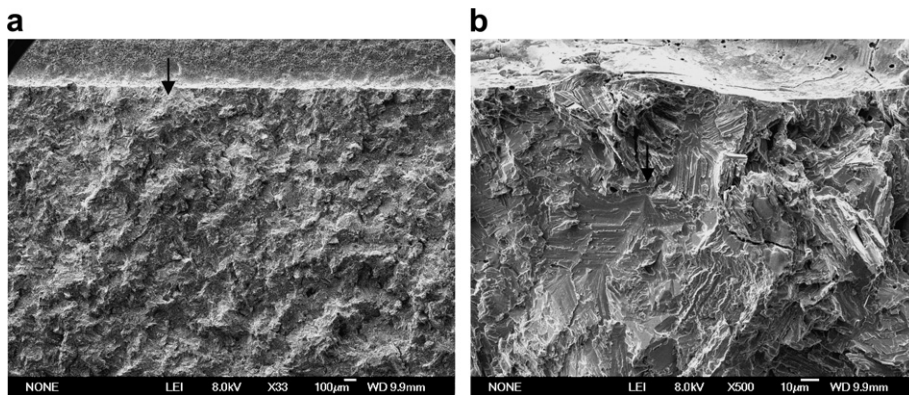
Fracture surface of specimen B-3PB-301 after 3PB test. (a) A general view, the blank arrow showing the origin of cracking and (b) a close-up view of the original critical crack which triggered cracking through the entire specimen.
